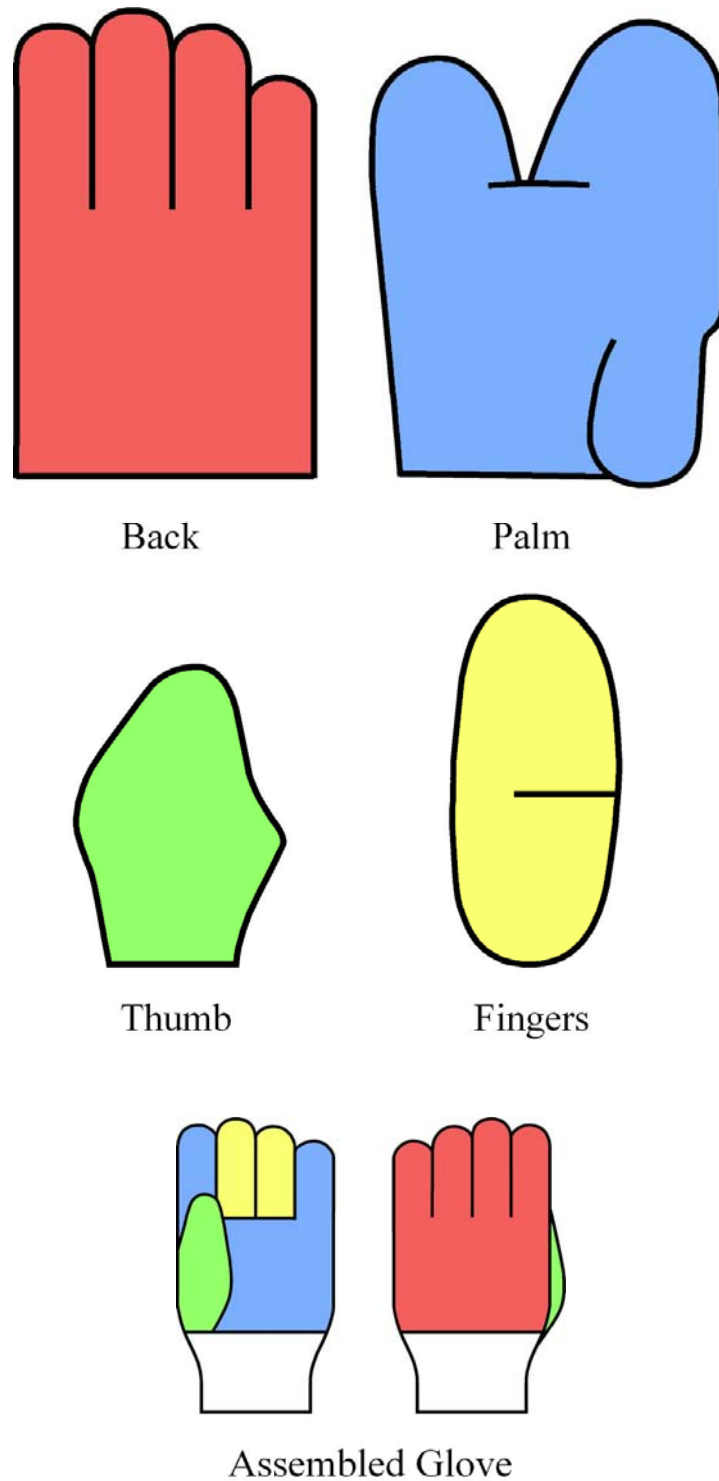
Gunn pattern pieces. Colour coded to indicate their assembly.
